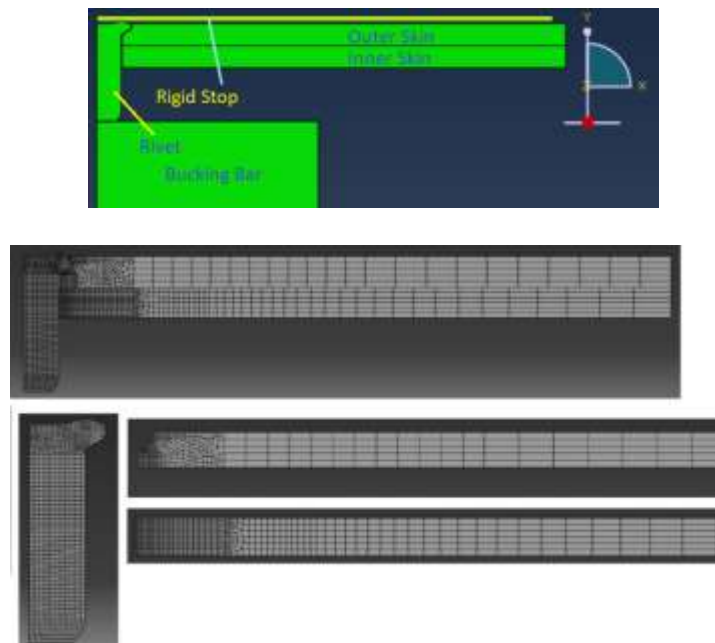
Rivet Stackup Assembly and Stackup Mesh.
